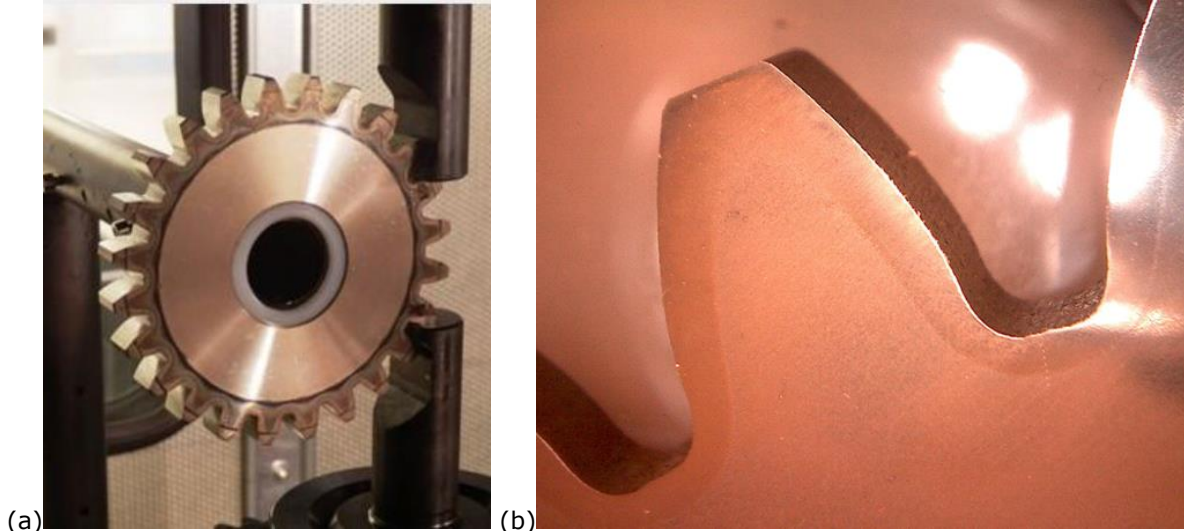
The model gear for component fatigue testing at Gerdau. (a) Mounted in the fatigue testing rig and (b) detail of the gear tooth geometry.
